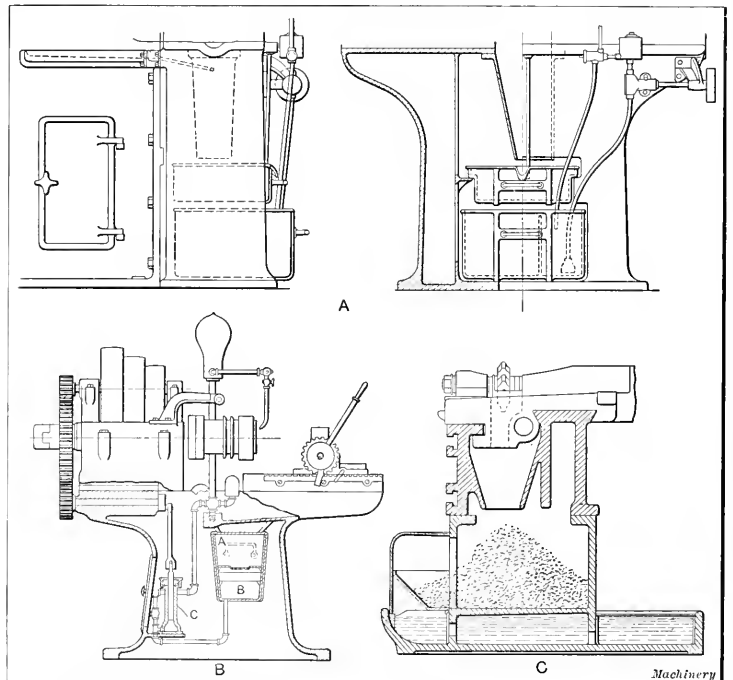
A, Drainage Tank placed above Main Supply Tank; B, Common Lubricating Arrangement for Threading Machinery; C, Gear-cutting Machine with Provision for storing Oil in Base
